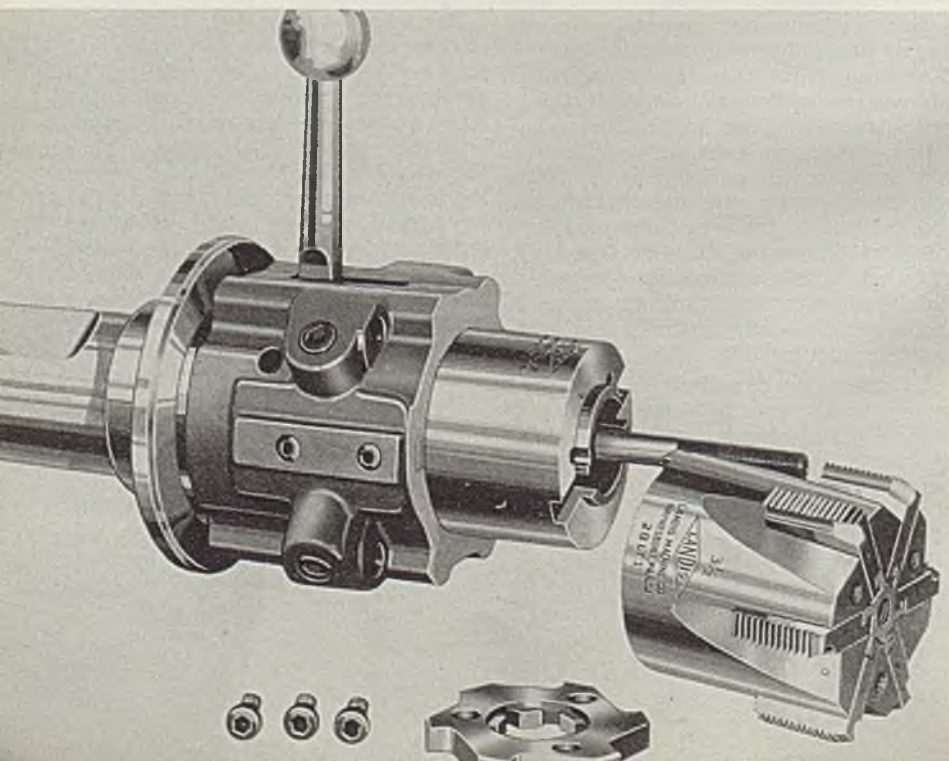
Collapsible tap for threading shell on automatic lathes. Made by Landis Machine Co., Waynesboro, Pa.
